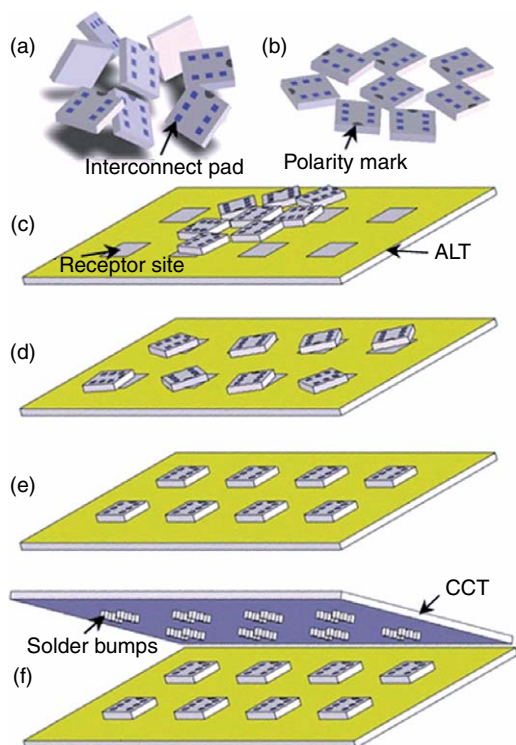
Batch assembly strategy: (a) randomly oriented bulk parts; (b) bulk parts are uniquely face-oriented and spread in a single layer; (c) parts are palletized on an alignment template; (d) parts are distributed one-to-one to receptor sites; (e) parts are aligned to the receptor sites with unique in-plane orientations; and (f) parts are bonded to a chip carrier template (CCT) via wafer-level flip chip bonding. (Source: Fang J, Böhringer K F 2006 Wafer-level packaging based on uniquely orienting self-assembly (the DUO-SPASS processes). *ASME/IEEE J. Microelectromech. Syst.* 15, 531–40.)
